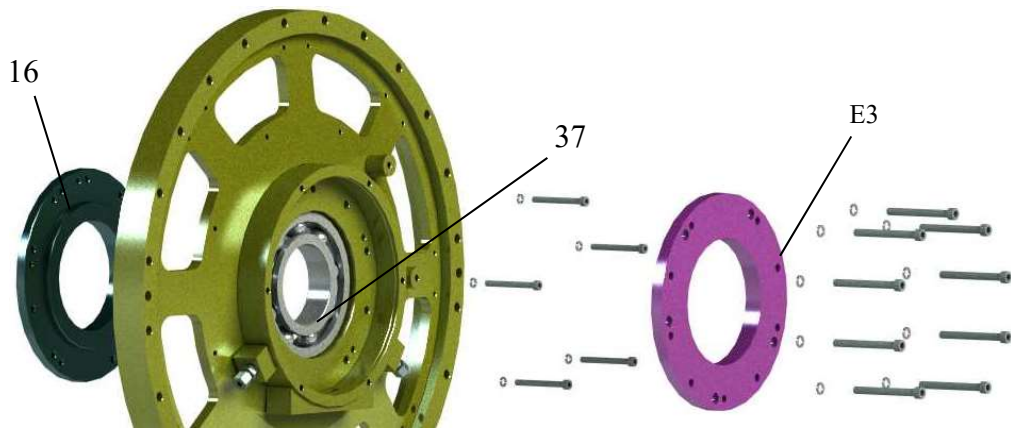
Installation of Male Labyrinth Seal into Bearing Shield on the Drive Side
